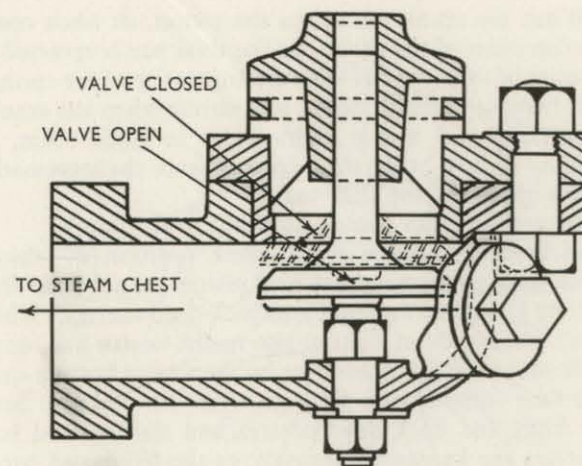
ANTI-VACUUM VALVE MOUNTED ON STEAM CHEST
